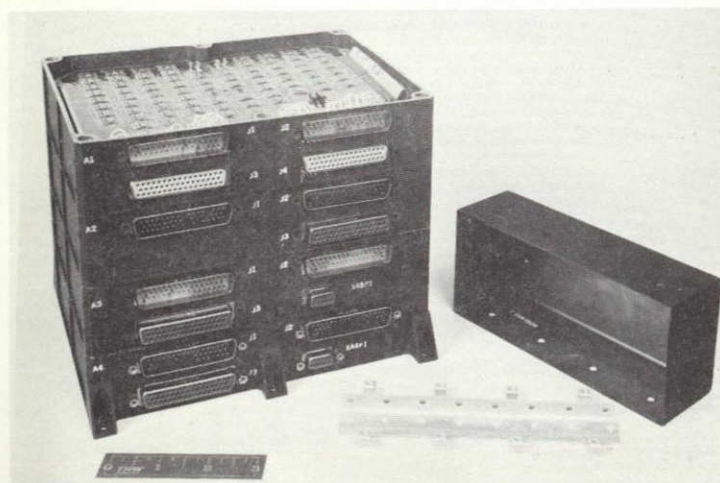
Slices Stacked to Form an Assembly. One Row of Connectors is for Slice-to-Slice Interconnections. Cover for this Harness is also shown.
